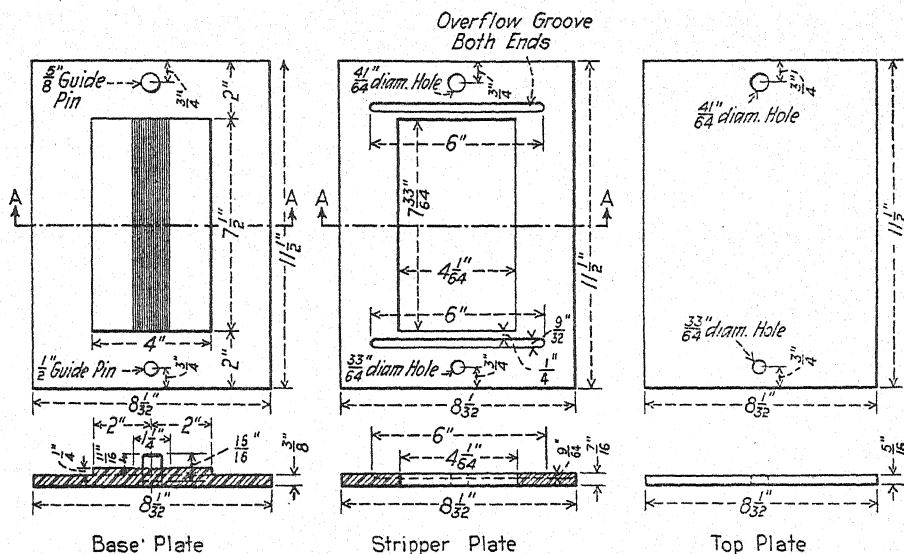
Mold for Preparing Test Specimens for du Pont Flexing Test.
